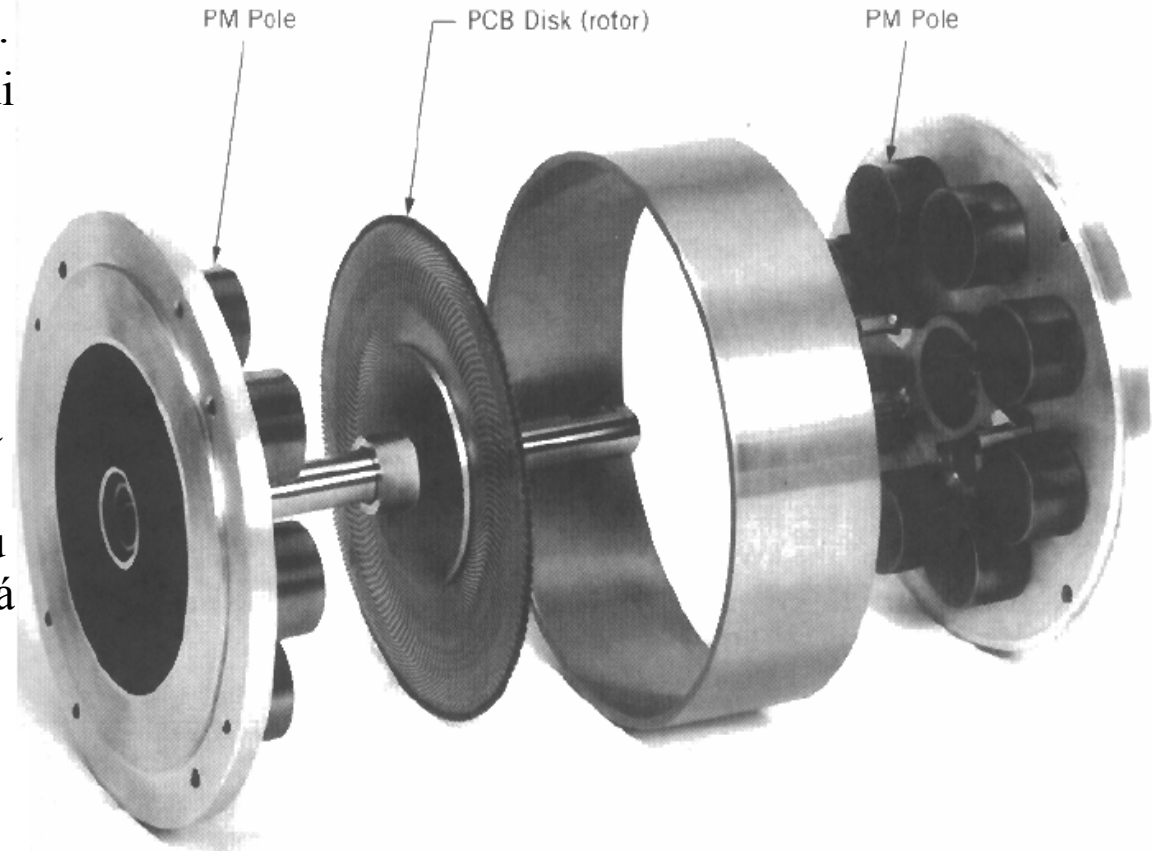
PCB motor assembly. (Courtesy of PMI Motion Technologies.)
